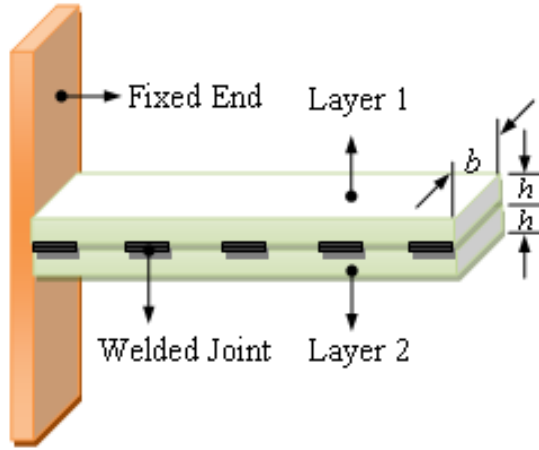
(a) Two layered tack welded cantilever beam model
